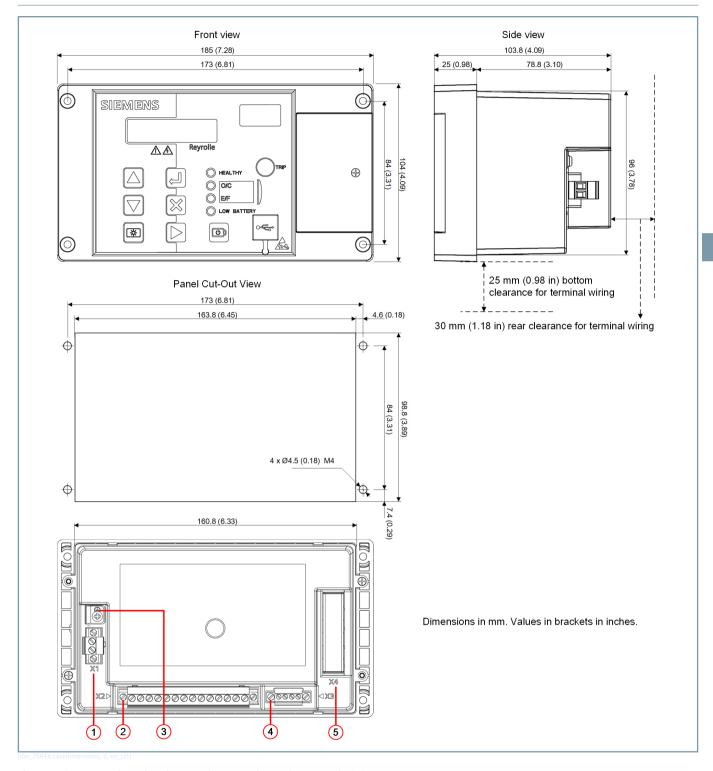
/13 Front View, Side View, Panel Cut-Out View and Rear Terminal View
